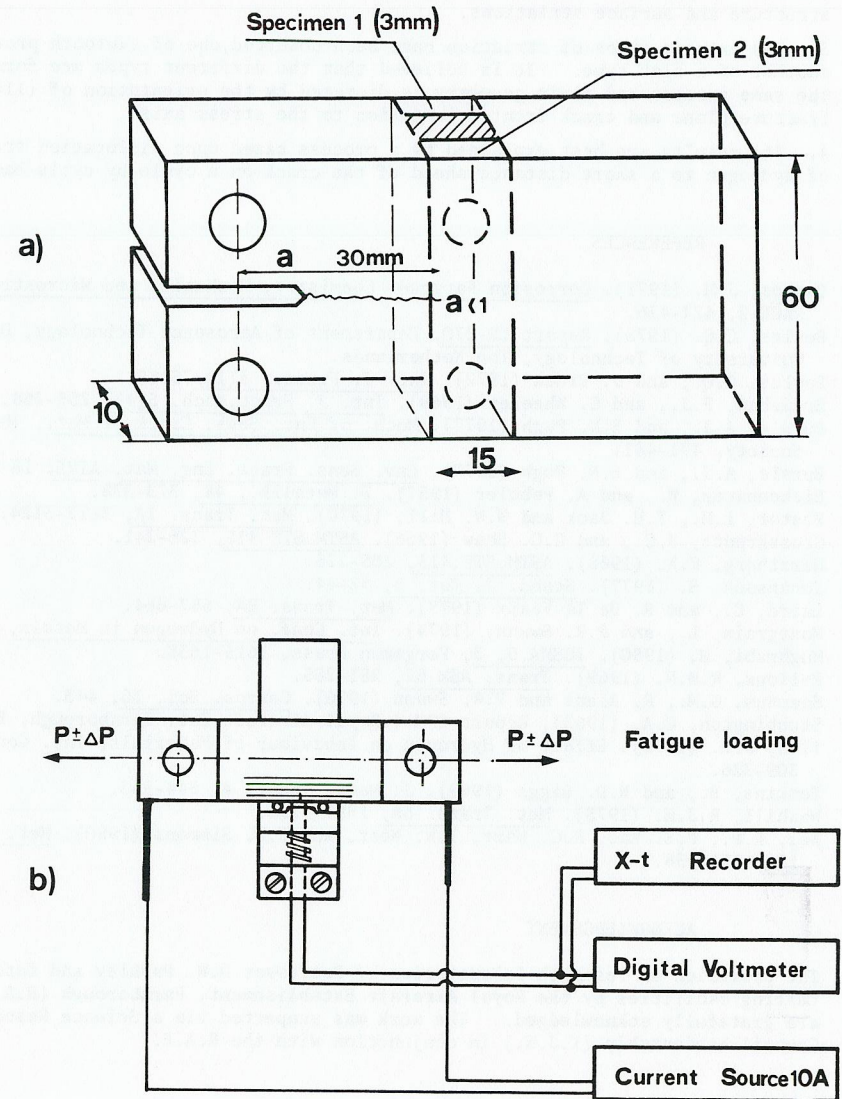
Schematic representations of (a) machining of the short crack (SEN) specimens from a long crack (DCB) specimen and (b) the testing arrangement employed.
